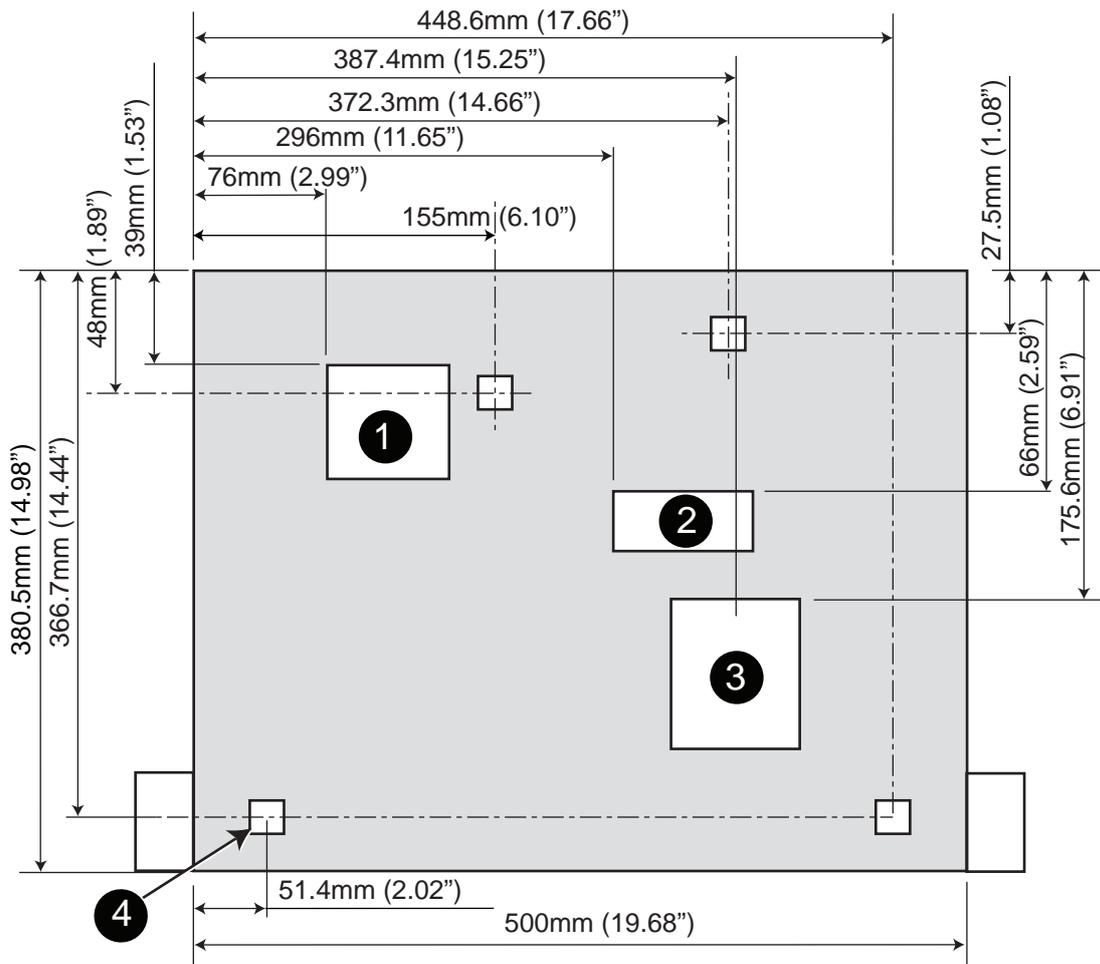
Front and Side View - Casino Top Box - Dimensions
